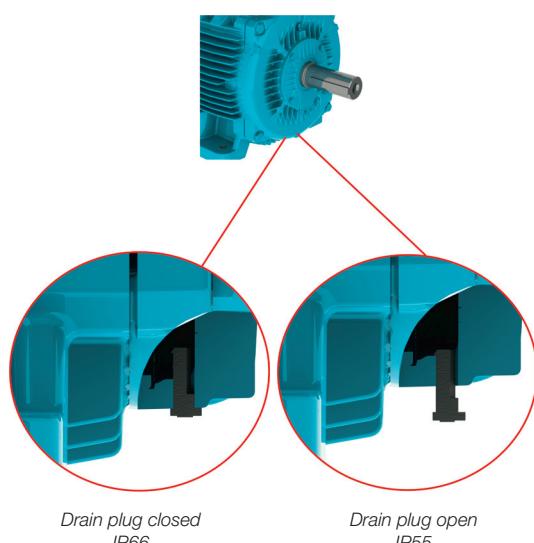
Detail of the drain plug position on the drive endshield (frames 160-355)
